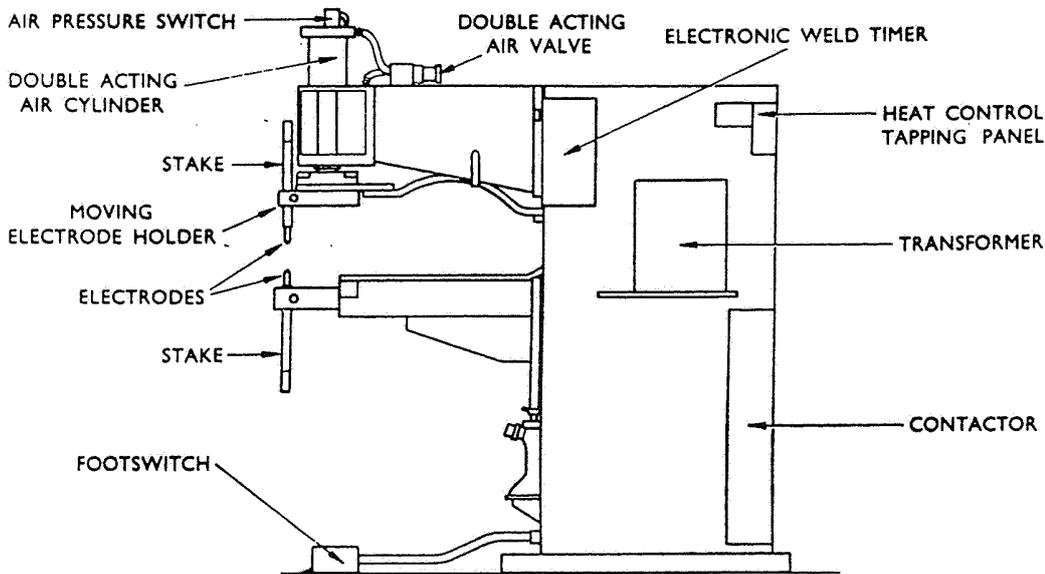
LAYOUT OF TYPICAL WELDING MACHINE
